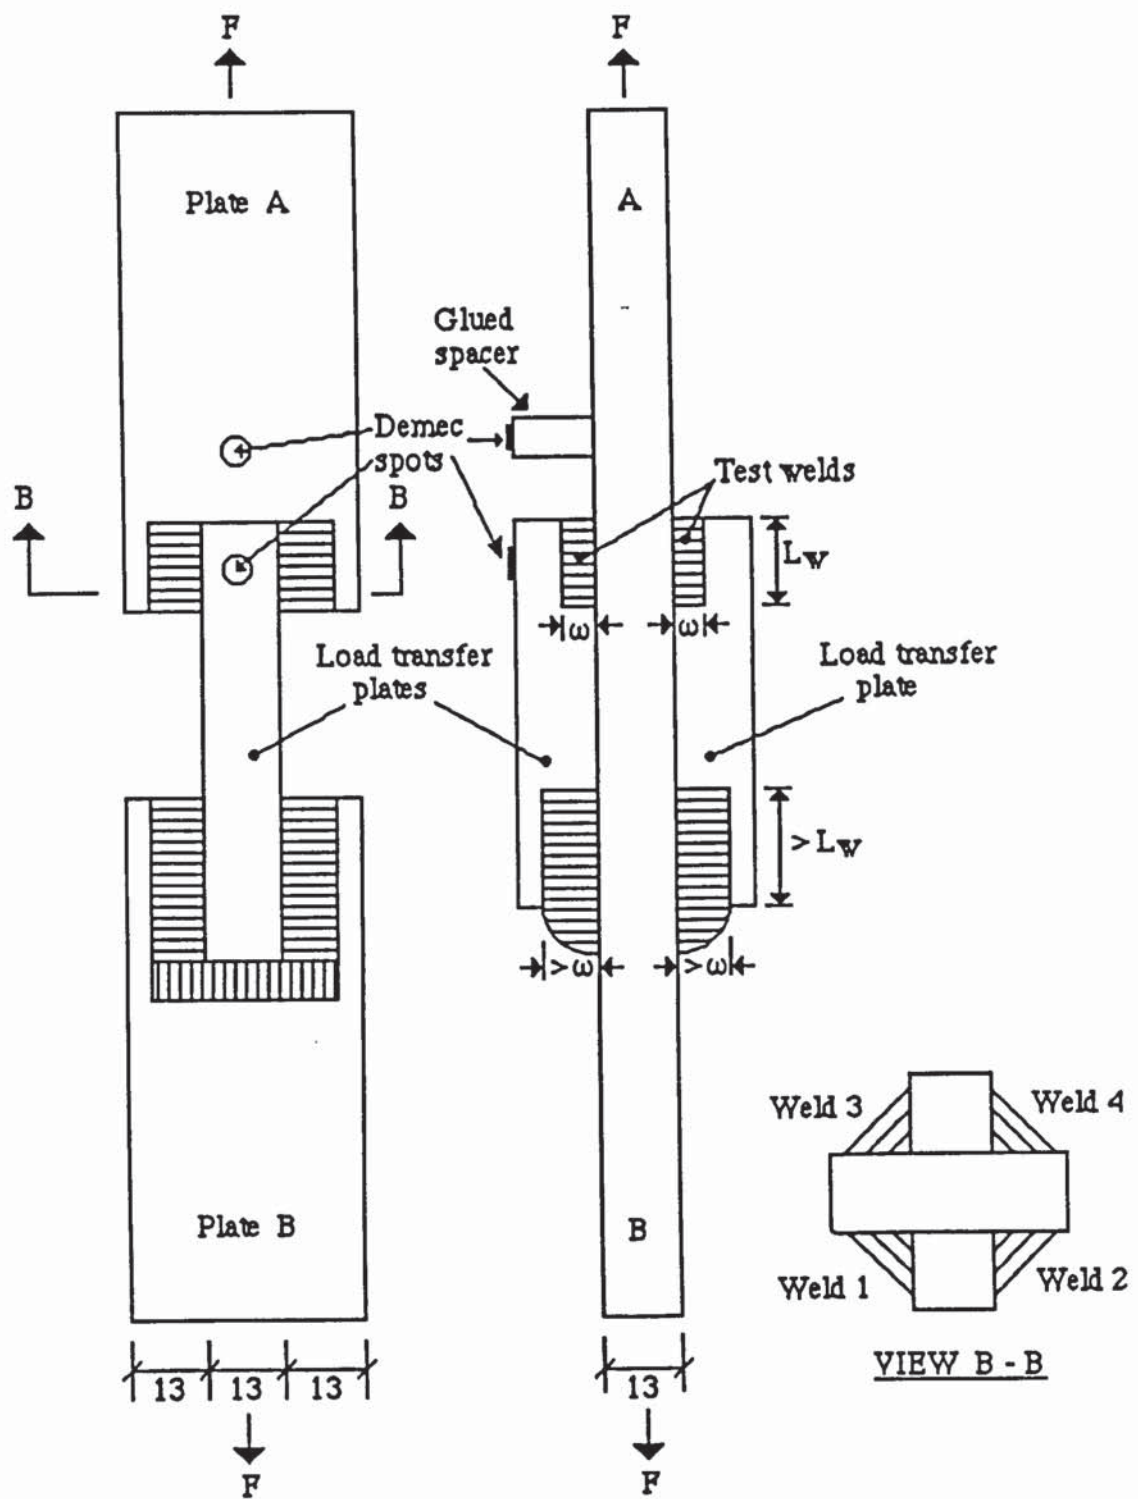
Longitudinal fillet welded test specimen.
